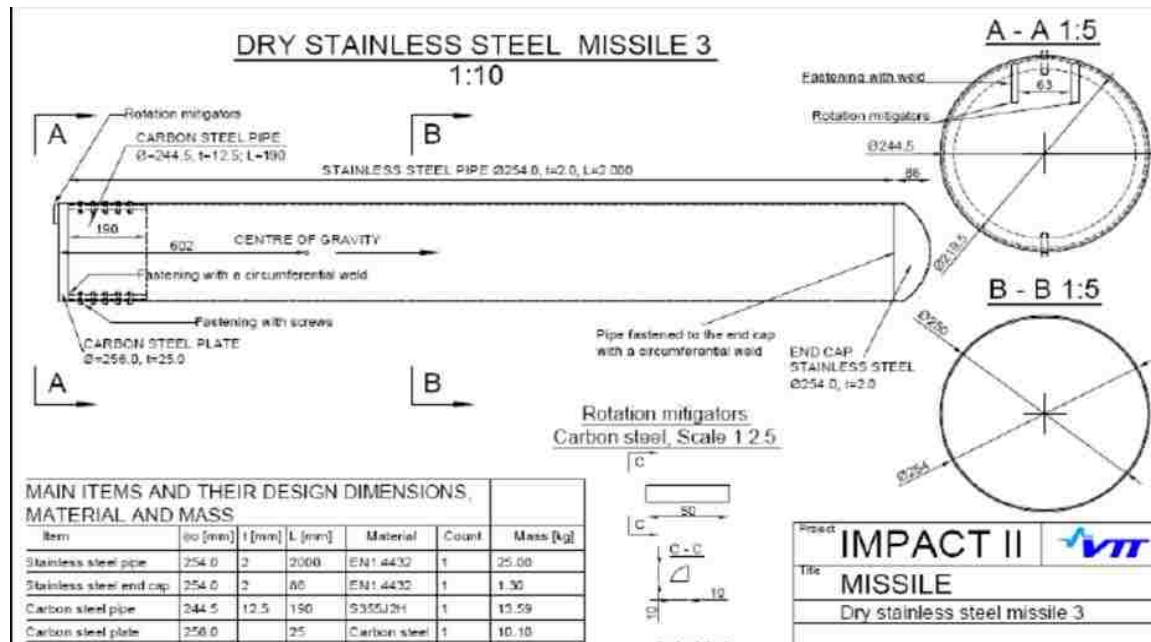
ISRN VTT flexural steel missile engineering drawing
